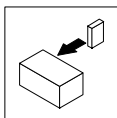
Dimensions 8211 - 8214: DIN-rail assembly
